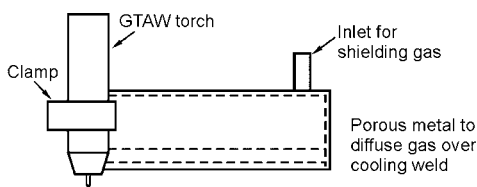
Trailing shield. GTAW, gas tungsten arc welding
